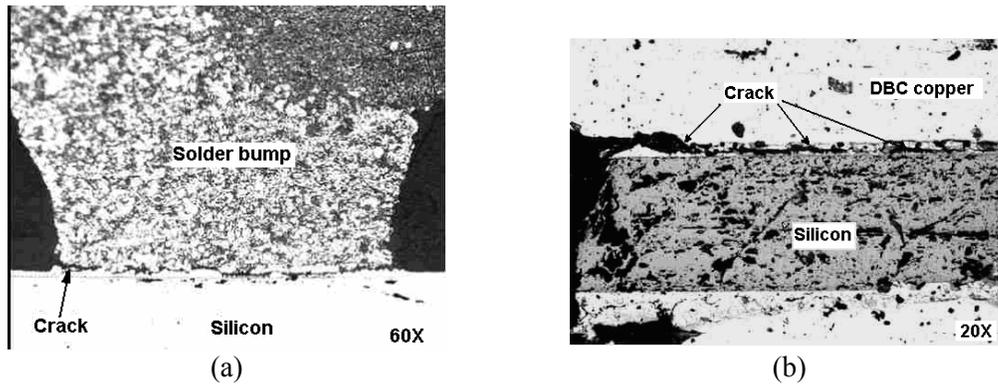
Cracks at the solder-silicon interfaces in a failed SB package (a) and those in a failed DS package (b) after 875 thermal cycles.
